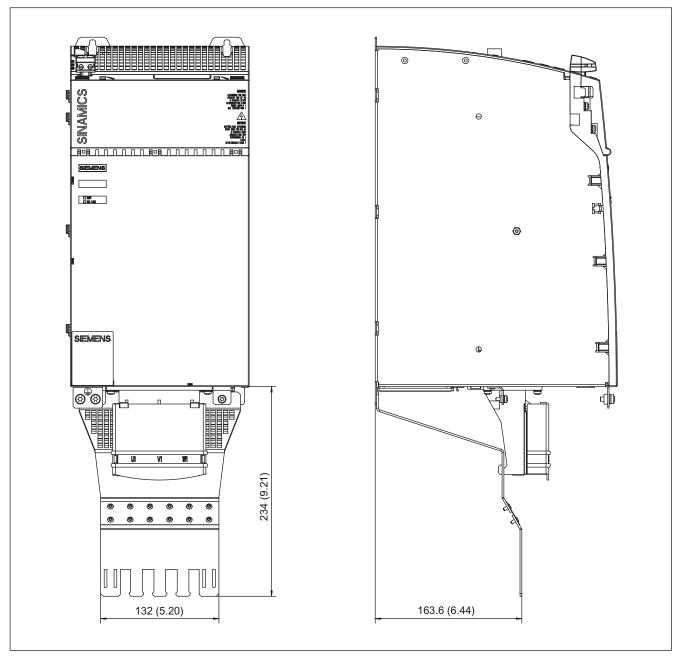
Dimension drawing of shield connecting plate on a 200 mm component with internal air cooling, all dimensions in mm and (inches)
